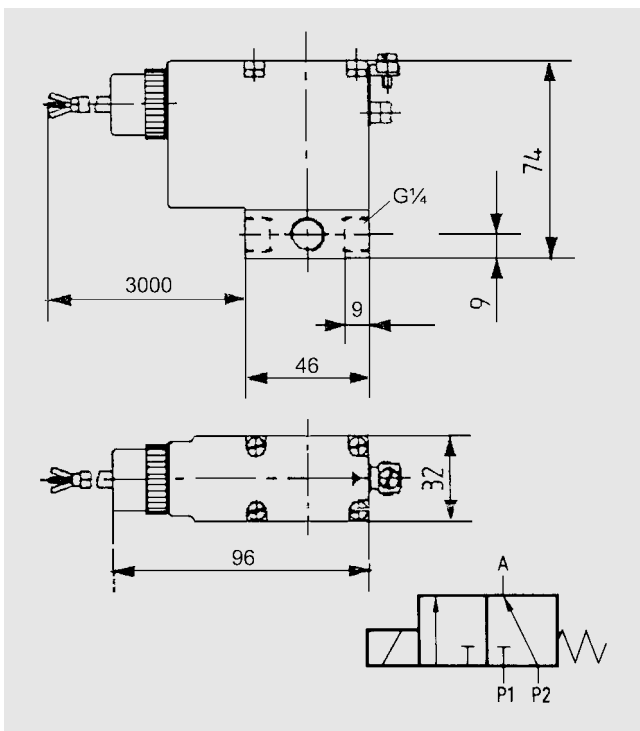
/30 3/2-way solenoid valve made of stainless steel, explosion-proof
